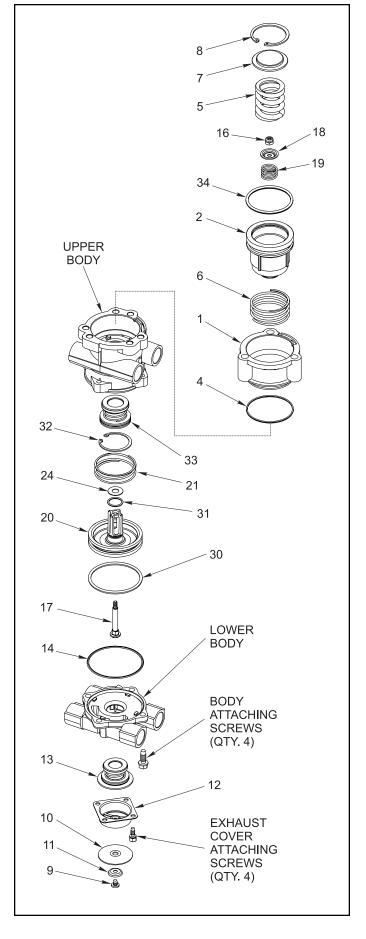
ESPBRAKEVALVE - EXPLOSED VIEW
